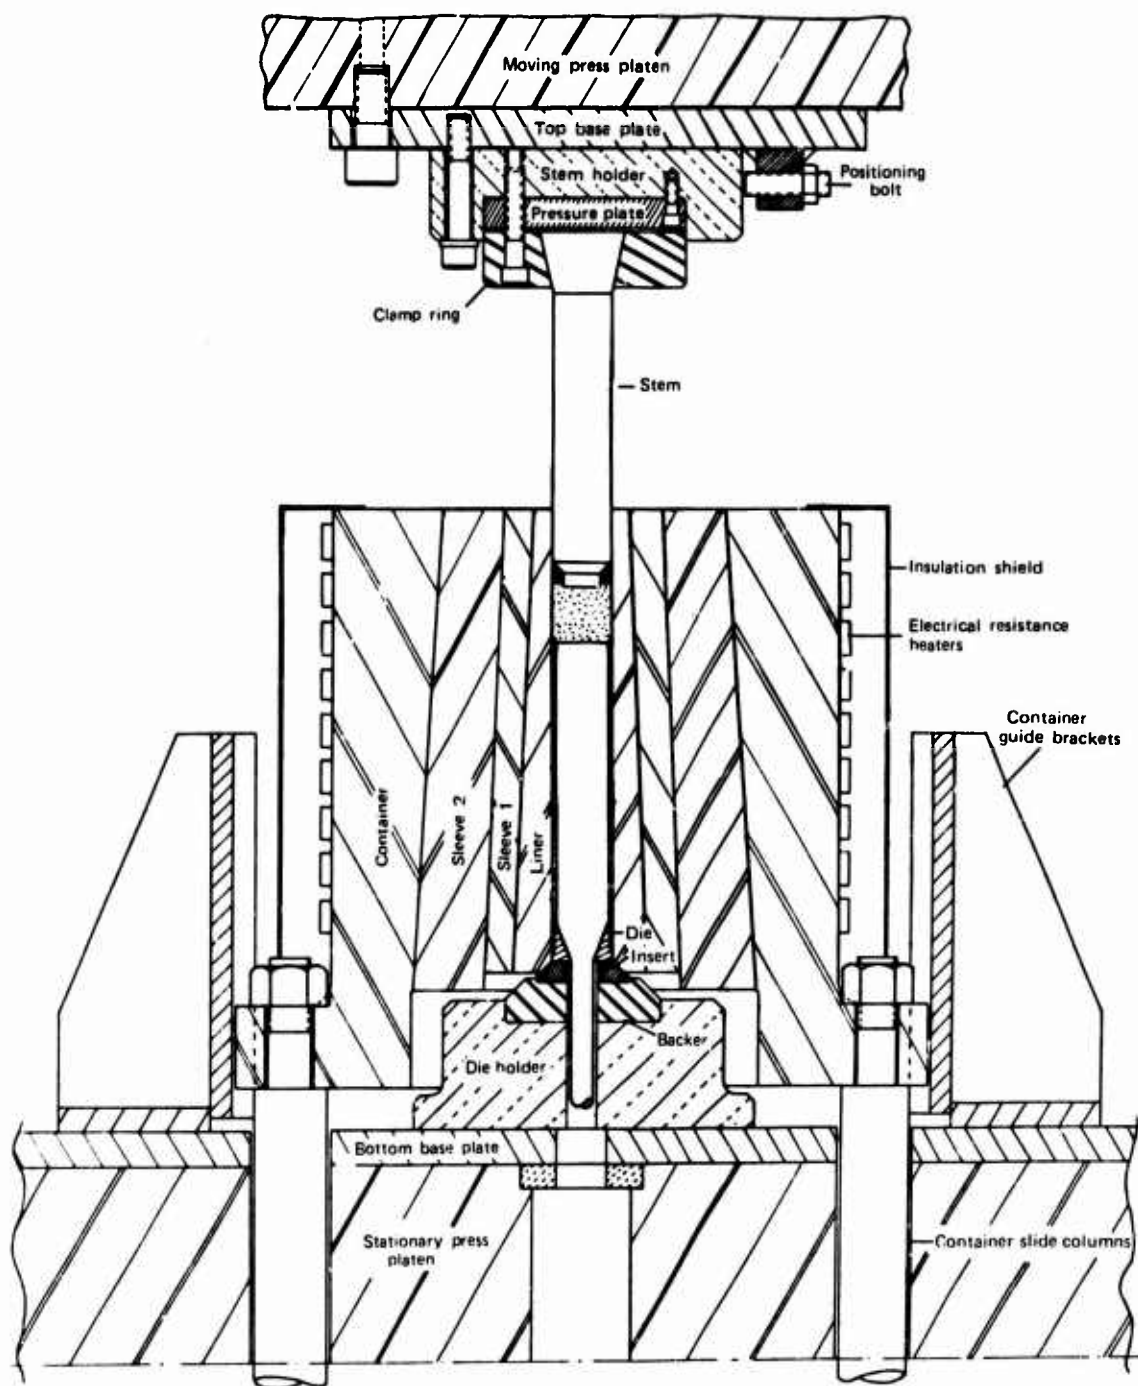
Hydrostatic Extrusion Tooling Used in This Program.
